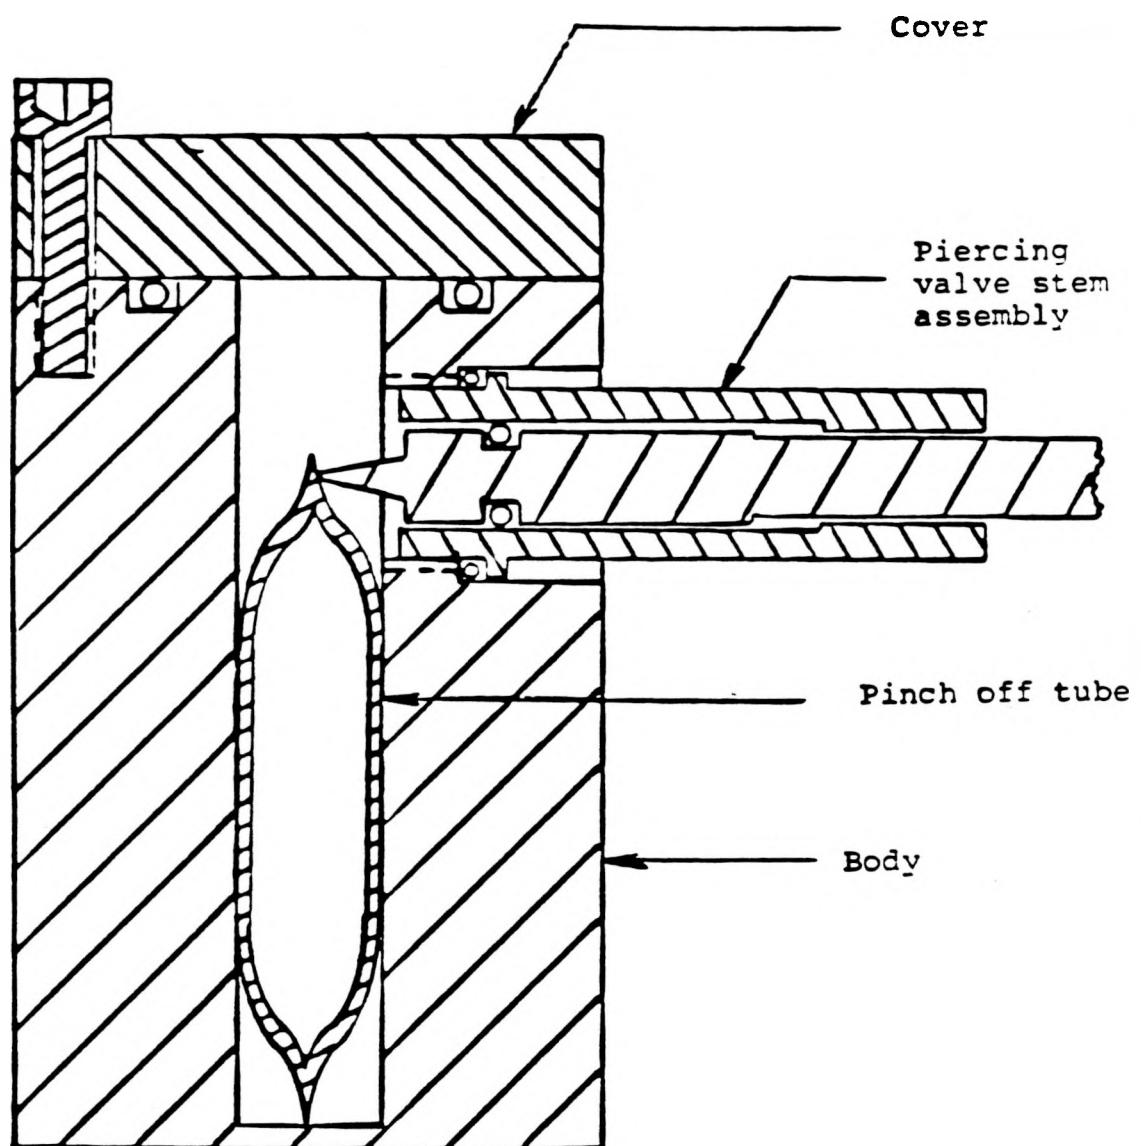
Piercing device for pinch off tube. (Gas inlet and outlet ports not shown.)
